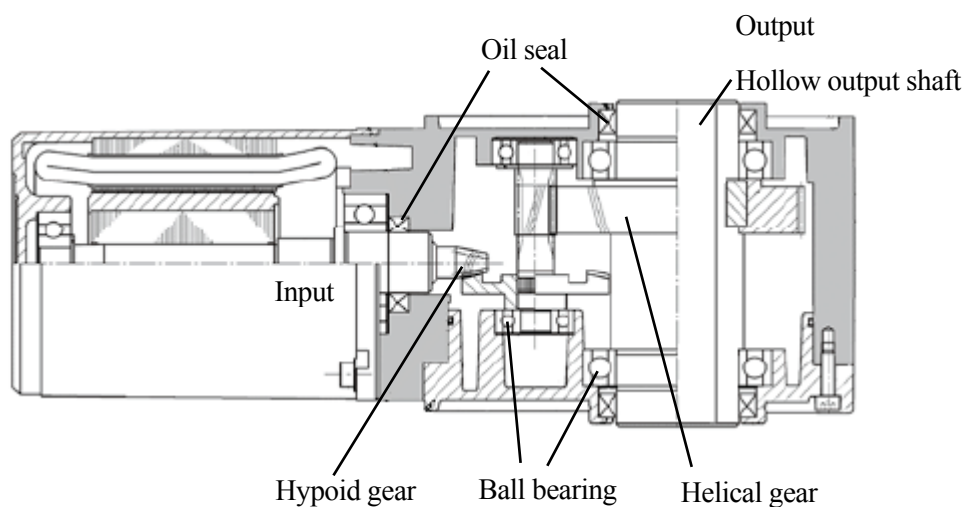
Structure of small-sized gear reducer, right angle type [7]
